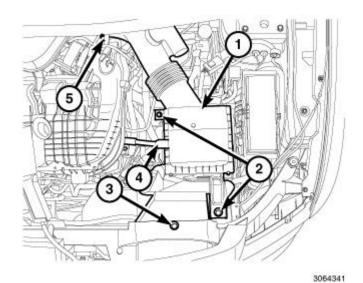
Fresh Air Makeup Hose, Air Cleaner Body, Push Pin, Two Bolts & Clamp Courtesy of CHRYSLER GROUP, LLC
